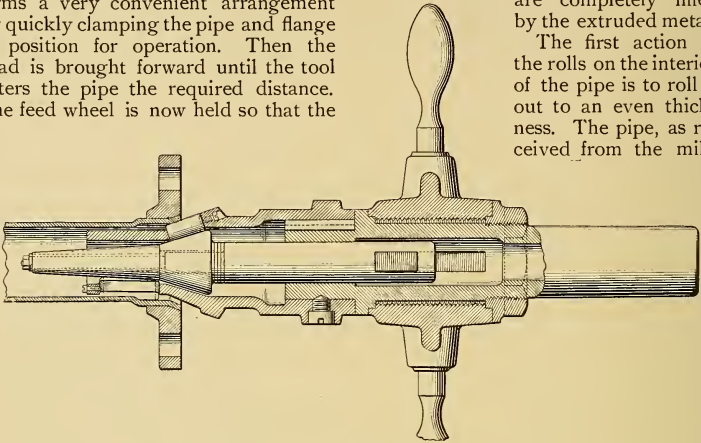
SECTIONAL VIEW OF A 4-INCH EXPANDING TOOL
